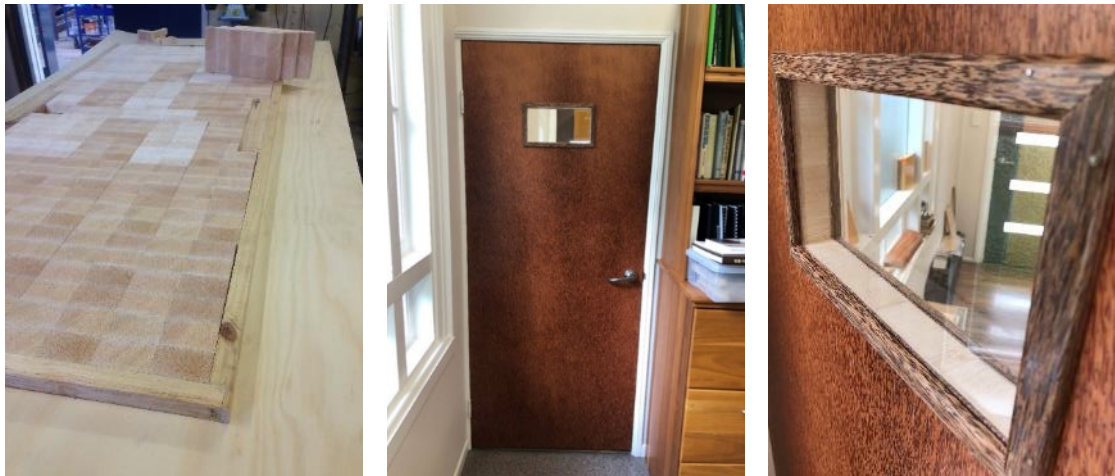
Laminated balsa core door manufacture (left), final installation (centre) and internal detail (right).
